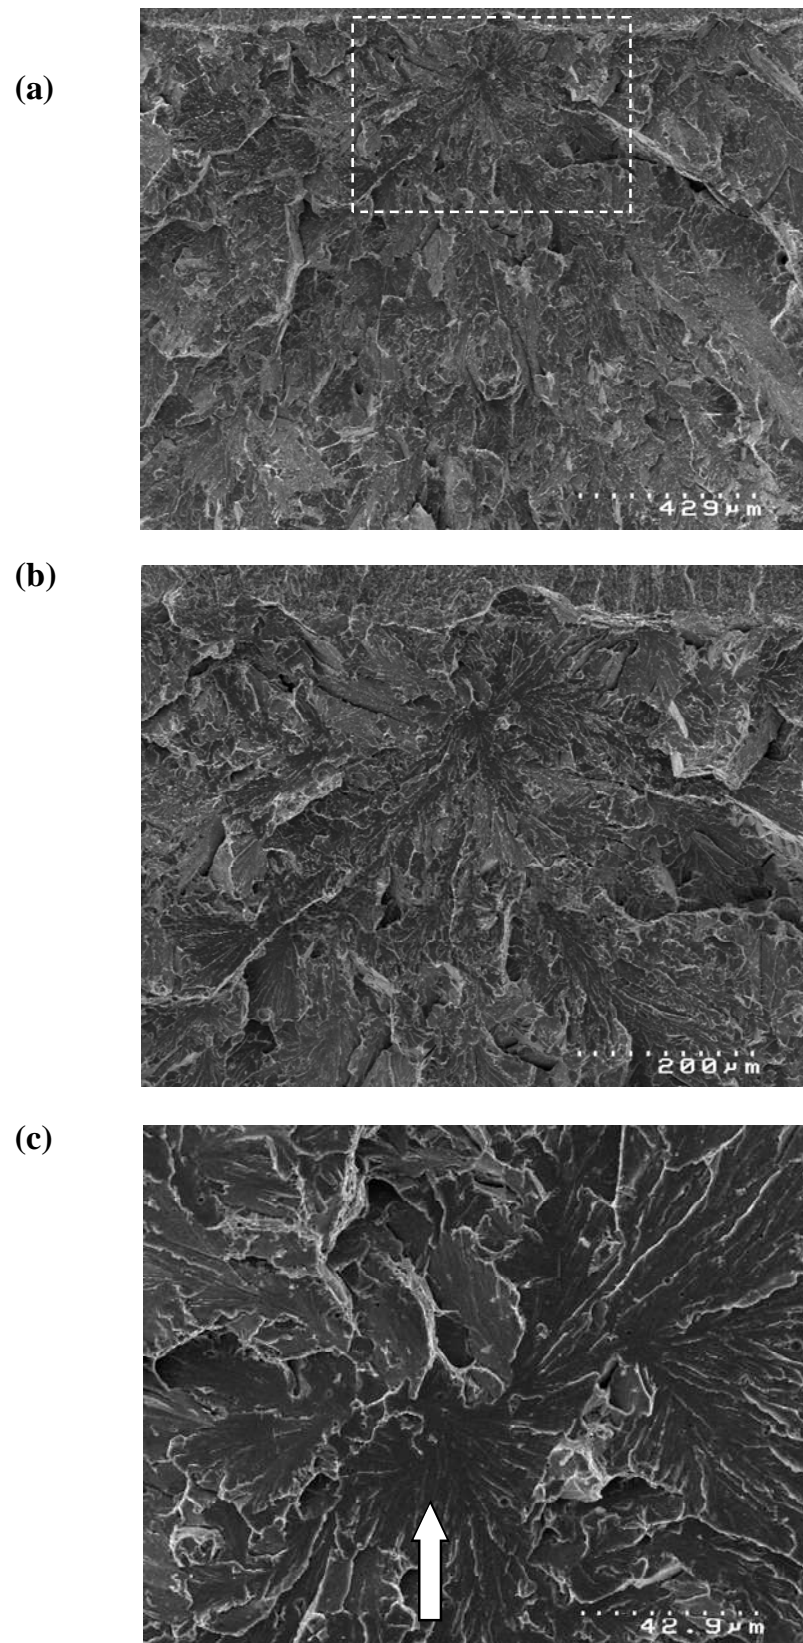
Weld N°2 Sample 5, RH5%SA; (a) general fracture surface, (b) magnification of framed area, (c) further magnification, noting the CIS, secondary cracking through the CIS.
